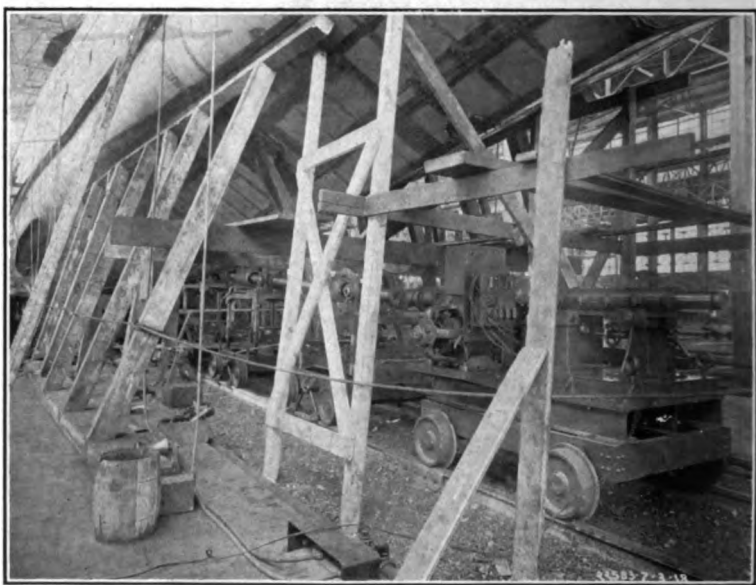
PLATE XIII.—BORING STERN AND STRUT CASTINGS.
